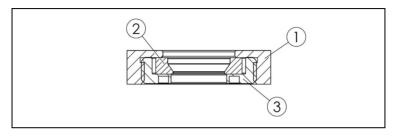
Design of counterbalance clamping sleeve 6214ZN-01-02
